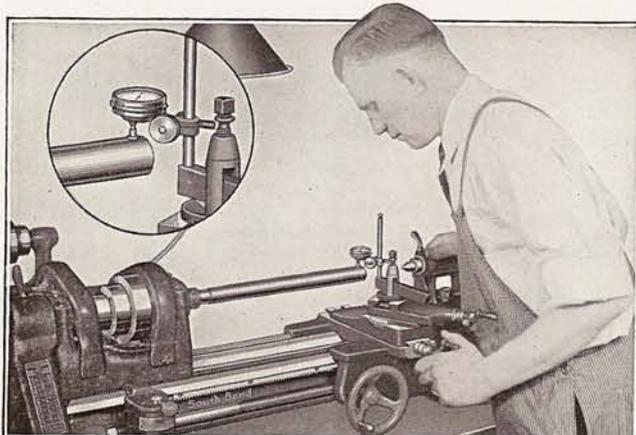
Testing Alignment of Headstock Spindle of 9-inch "Workshop" Lathe with Test Dial Indicator.
